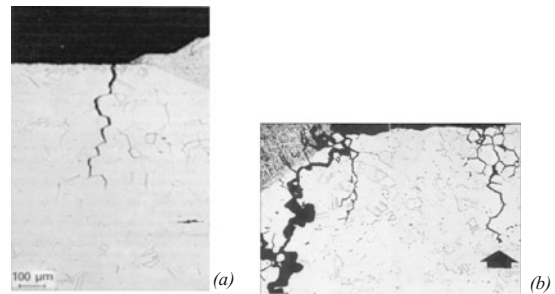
Intergranular cracking in HAZ of stringer bead weld on 304 SS due to zinc embrittlement weld area had been covered with zinc-rich paint. (Source: (a) Metal Handbook, vol.1, ASM, (b) Welding Research Supplement, Dec.1992)
